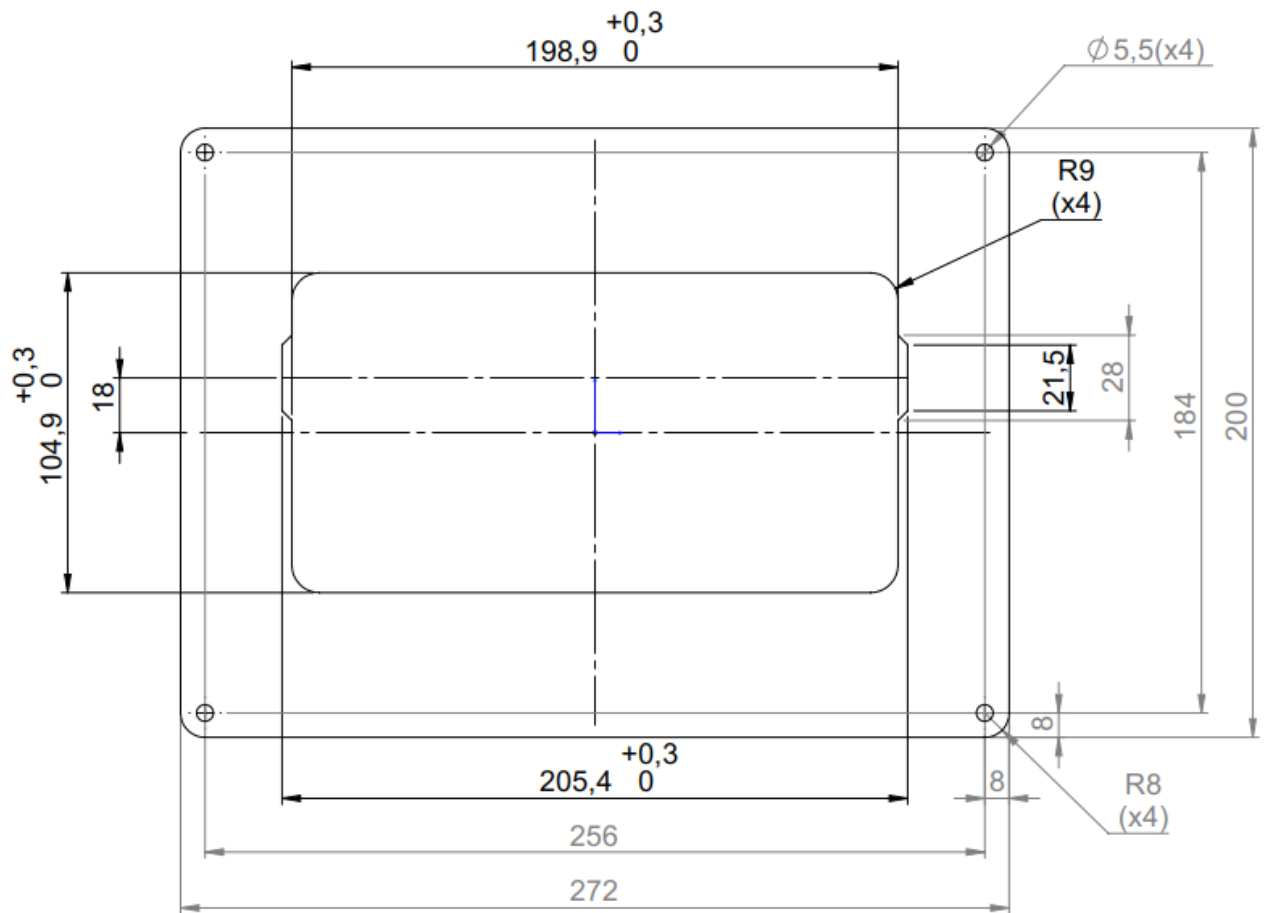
R6 CDU, Mounting frame dimensions [mm]
